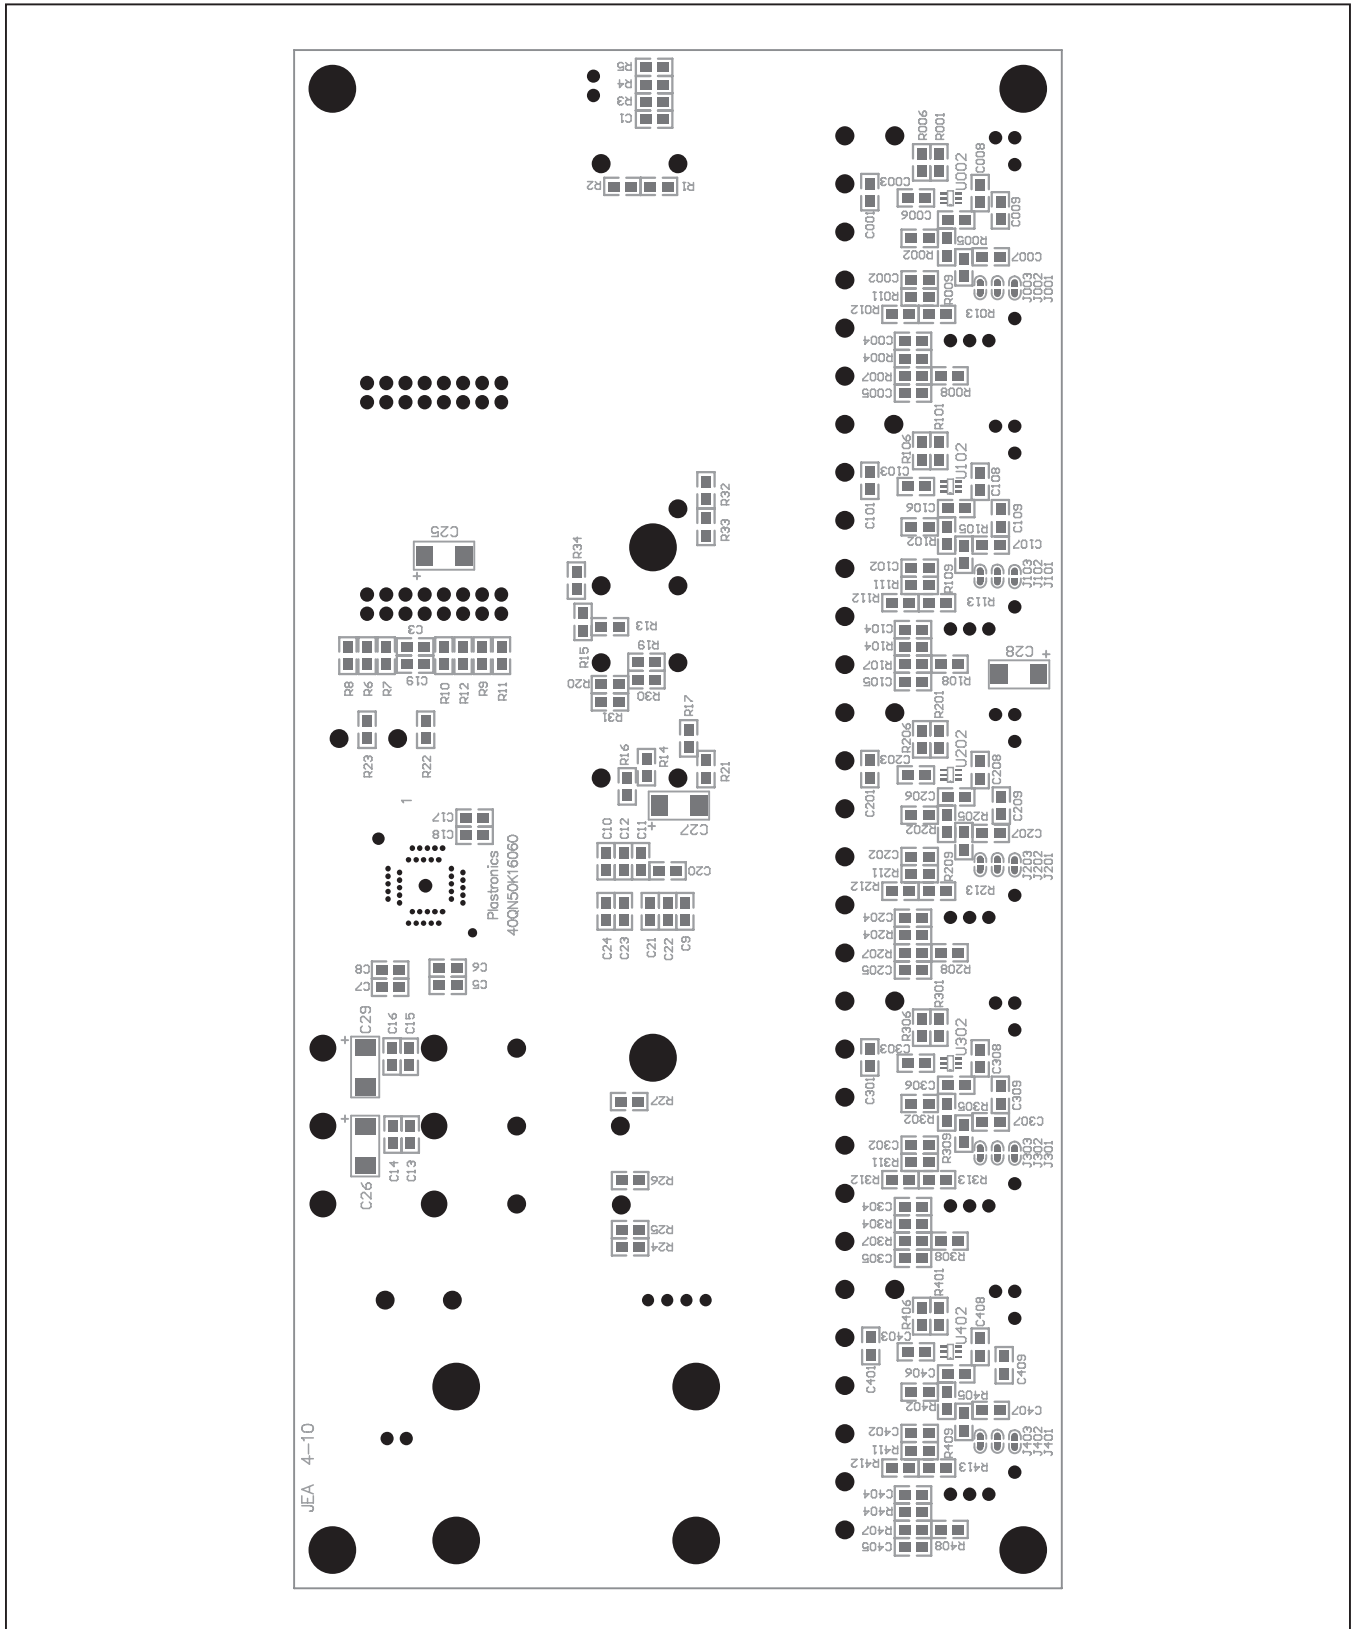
MAX34441 EV Kit Bottom Assembly Drawing
